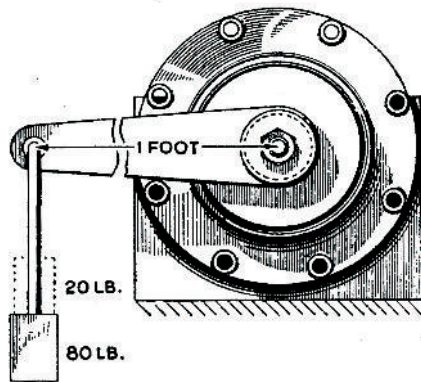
The Torque Test on Leyland C.A.V. Clutch.
